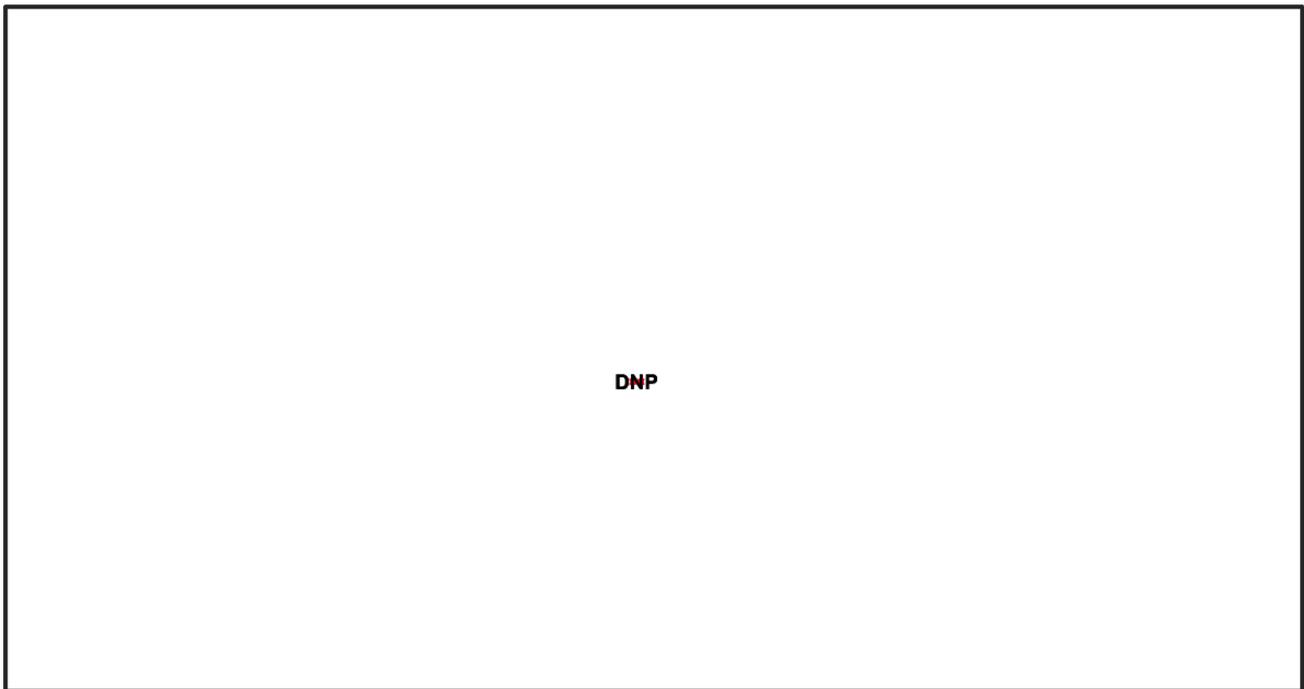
UCD3138064AEVM149 Bottom Assembly Drawing (no Components on This Side)
